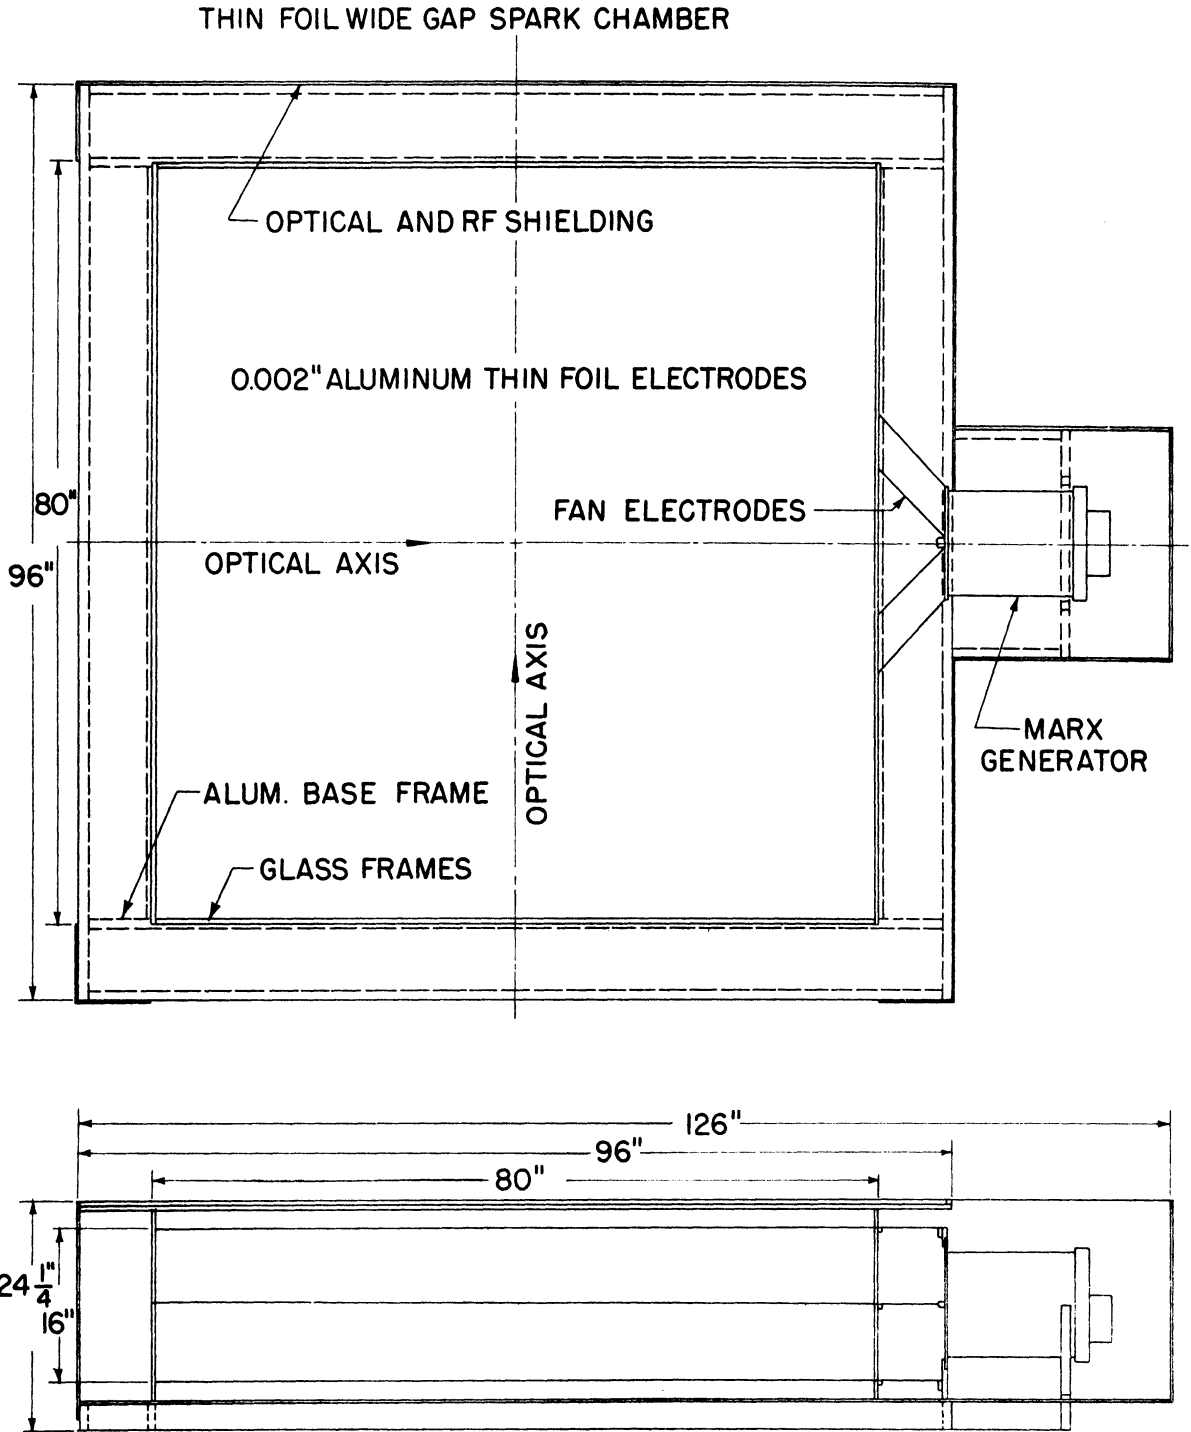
Partial Assembly Drawing of a Thin Foil Chamber
